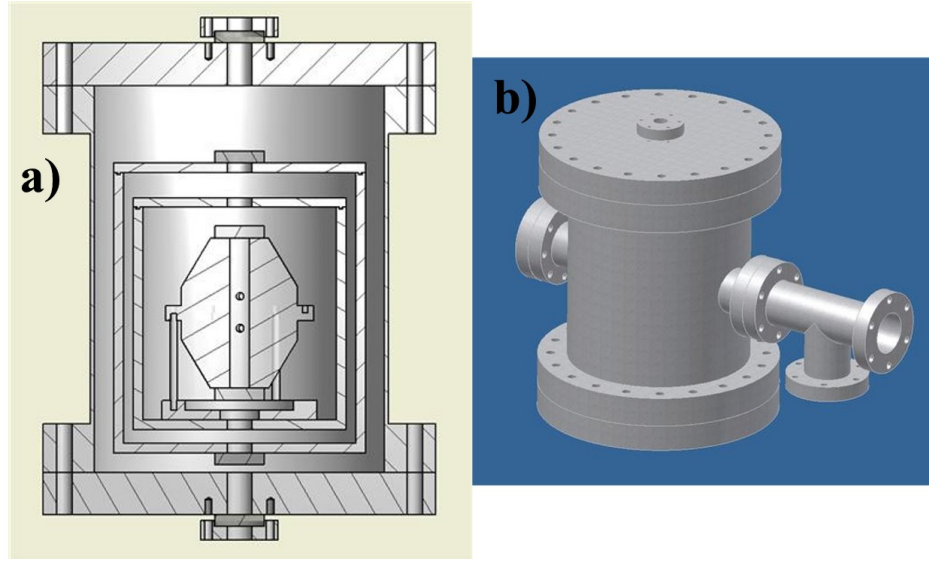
a) A drawing of the V-Cav vacuum and thermal shielding assembly. The vertically mounted cavity is placed on Teflon posts that sit on a Zerodur ring, which is enclosed within 2 aluminium heat shields and a Stainless Steel CF150 chamber. Not shown are the peltier elements between the boxes to temperature stabilise the system. b) An image of the finished system with electrical feed through and connection to vacuum pumps.
